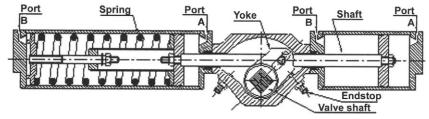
Scotch yoke actuator Courtesy of Delan BV
